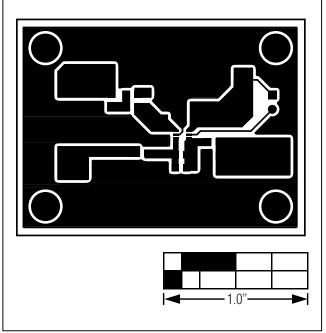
MAX9613 EV Kit PCB Layout—Component Side
